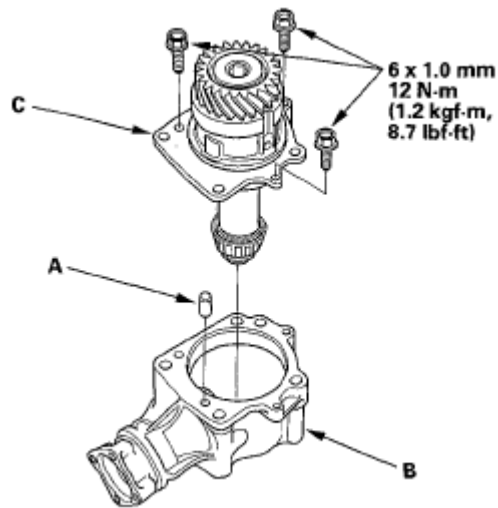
Identifying Dowel Pin, Transfer Housing And Transfer Holder Assembly With Torque Specification
